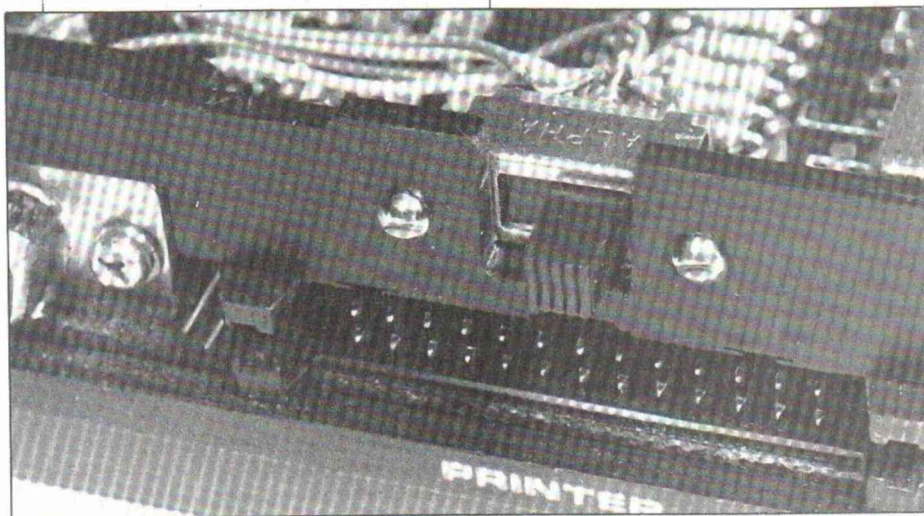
Screw the switch to the mounting plate and remount it in your 100. Be sure connections are secure. Clean up any debris before closing cover.
